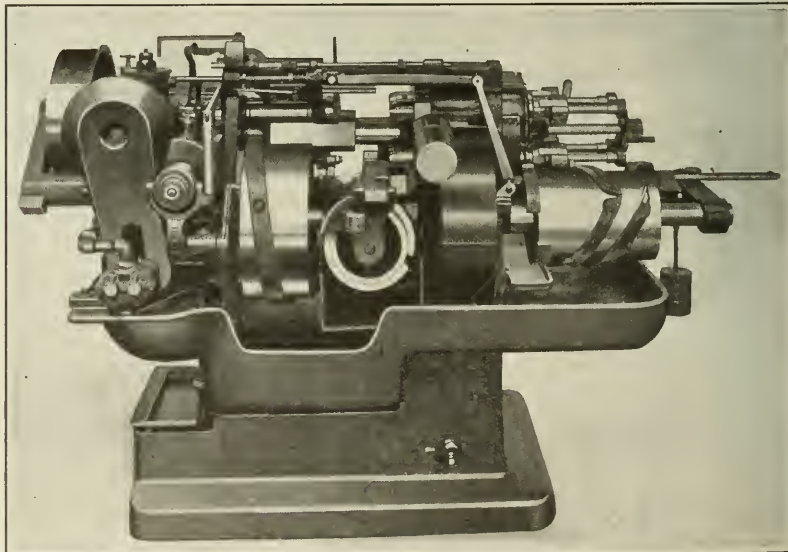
Rear View of Gridley Multiple-spindle Automatic Screw Machine
